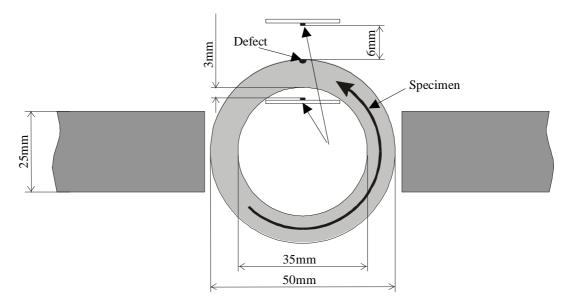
Experimental setup: defect detection on a ferromagnetic sleeve using MFL technique
